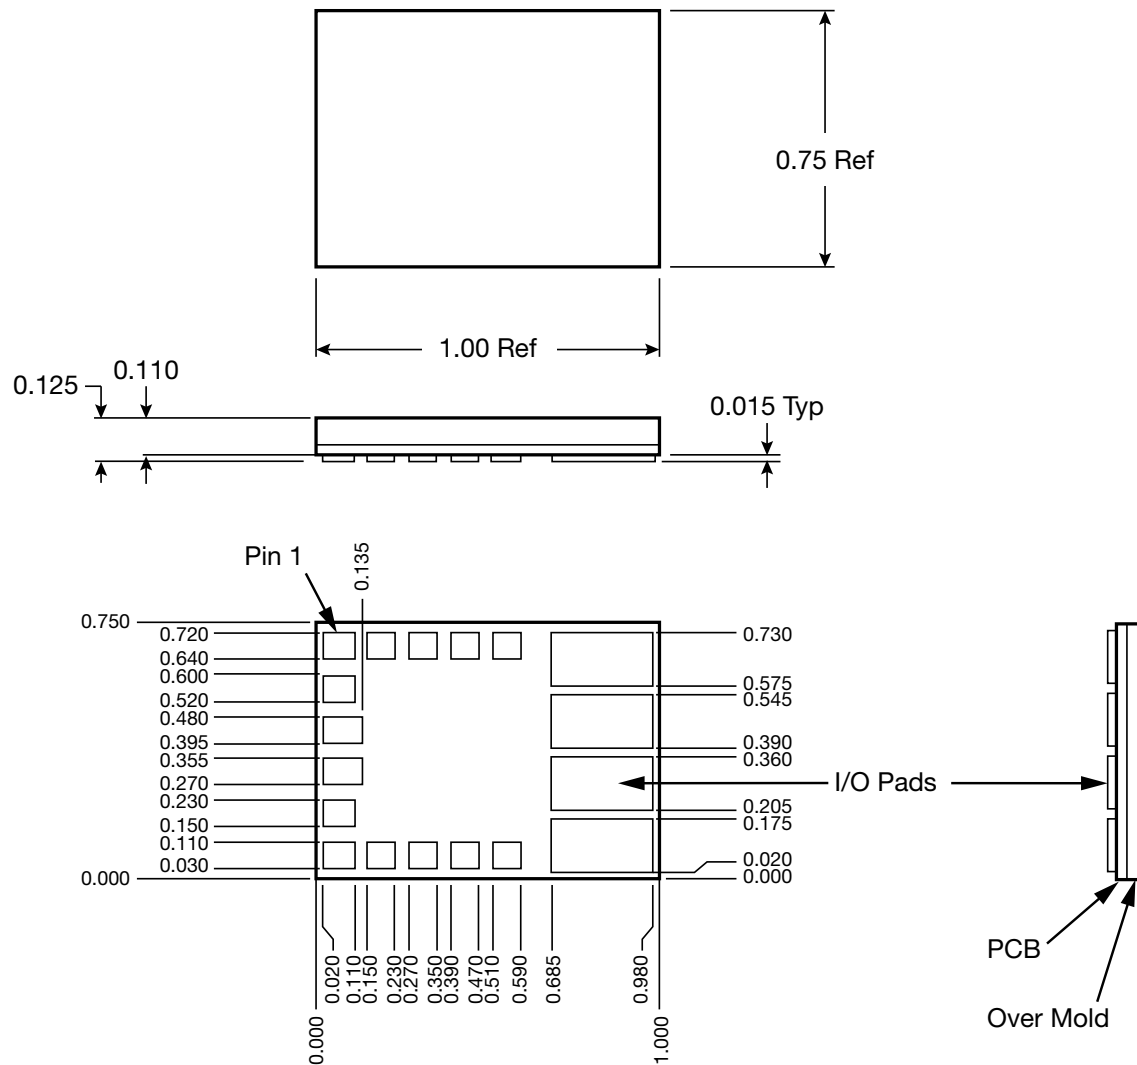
FBS-GAM02P-C-PSE Package Outline and Dimensions
